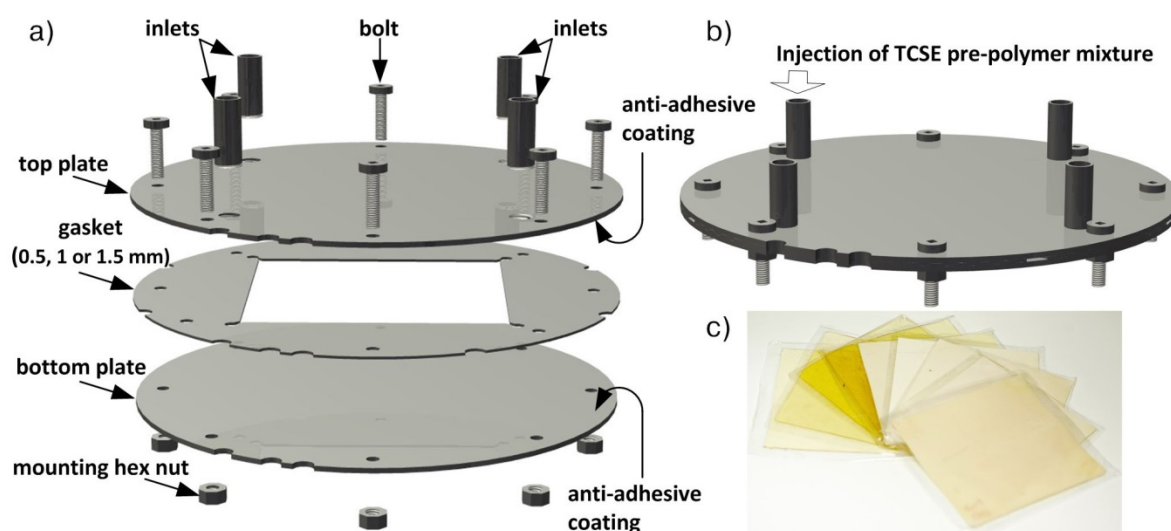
Construction of custom-built stainless steel mold for TCSE membrane casting in a) disassembled and b) assembled form; photograph c) shows 100 x 100 x 1 mm samples of cured TCSE protected with two plastic foils; the mold is compatible with standard laboratory hot plate if the curing at elevated temperature is required; see Appendix 1 for detailed drafting (CAD)
